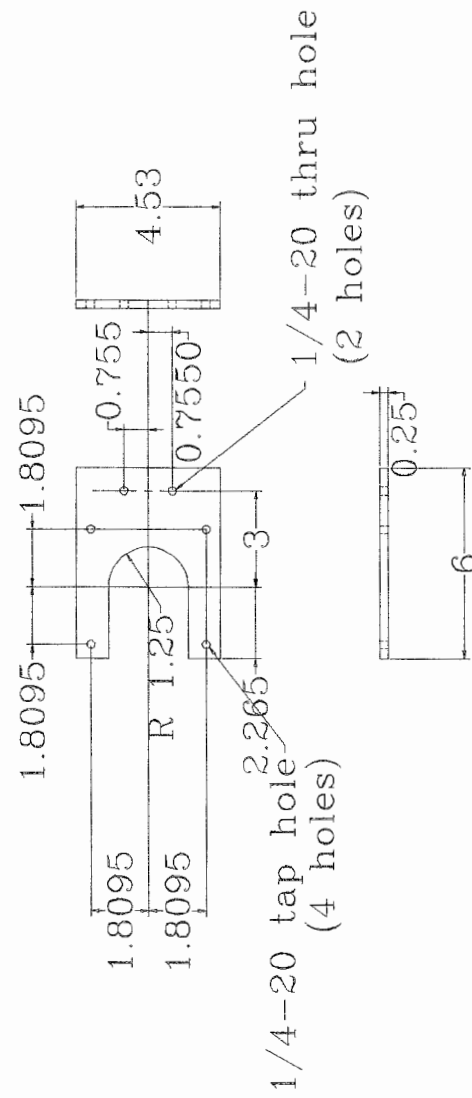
Part No. 4 Fork Motor Horizontal Plate
